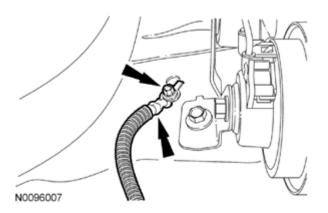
Locating EPAS System Wiring Harness Ground Mounting Bolt Courtesy of FORD MOTOR CO.
